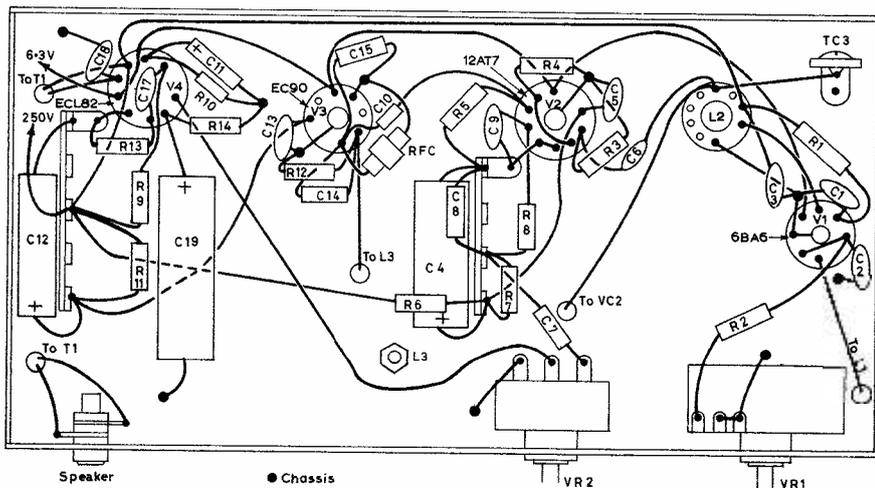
Wiring guide for components underneath the chassis. Wiring around the v.f.o. valve V3 should be kept as short as possible to improve stability.
